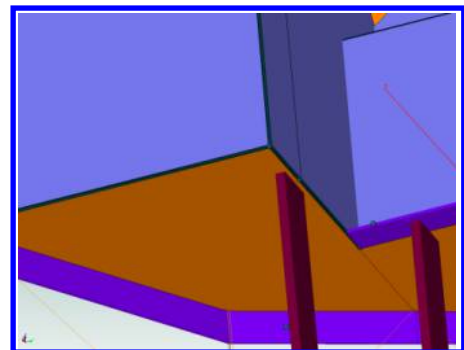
Model for ECLSS wall supporting beams and closeout panels.
